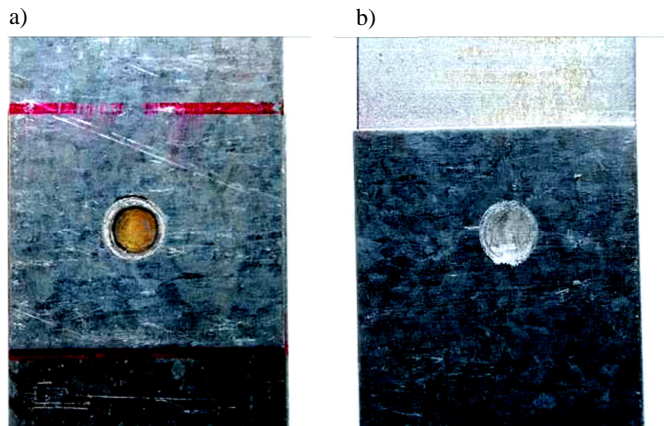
Marks of welding tips: a) standard RSW, b) DeltaSpot RSW
